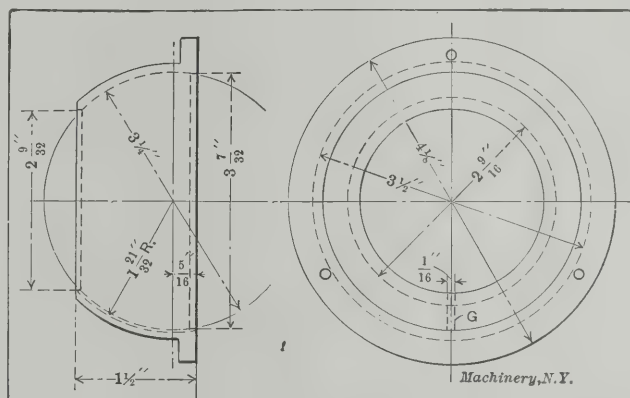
Casting which is held in the Fixture, Fig. 5, while a Groove is being milled in its Spherical Surface
